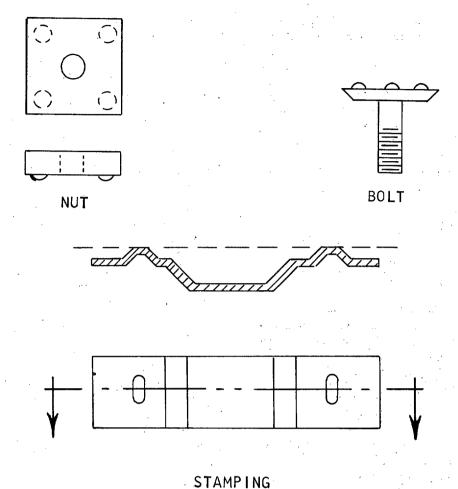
Examples of Fasteners and Clips Designed for Projection Welding
